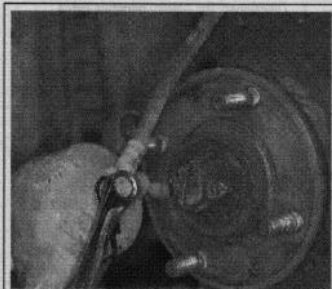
Grasp the caliper and lift it from the caliper assembly from the caliper support
